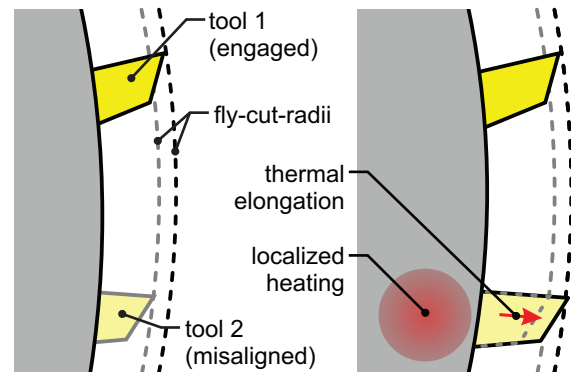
Local heating of tool holder to induce radial shift of the cutting edge
